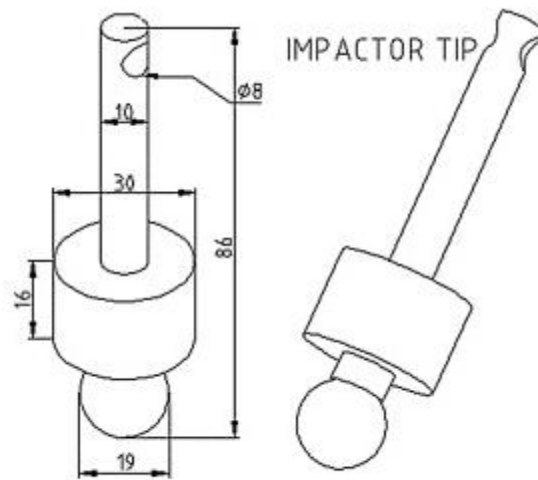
Hemispherical impactor tip to be used in all impact tests of flat and curved panel testing [19].
